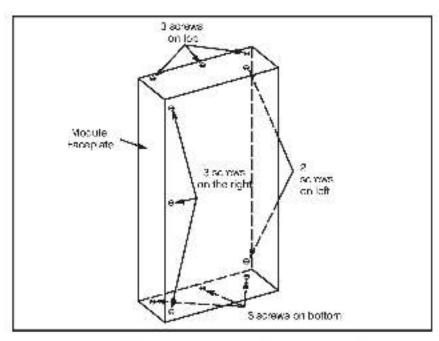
Disassembling the Module to Replace the 32mA Fuse:
